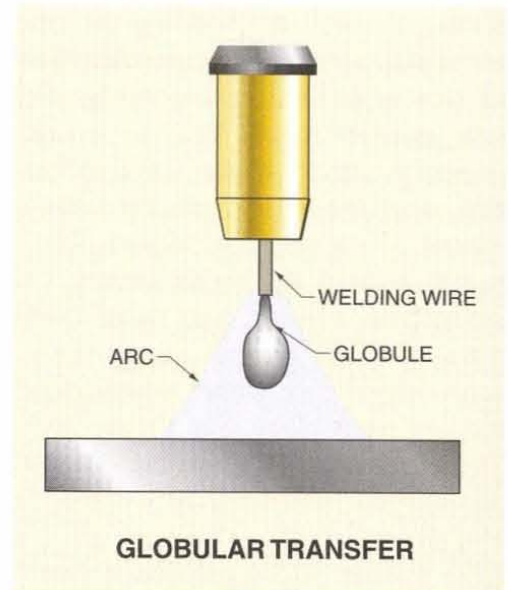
In globular transfer, the molten drop grows to two or three times the diameter of the welding wire before separating and transferring to the workpiece.
